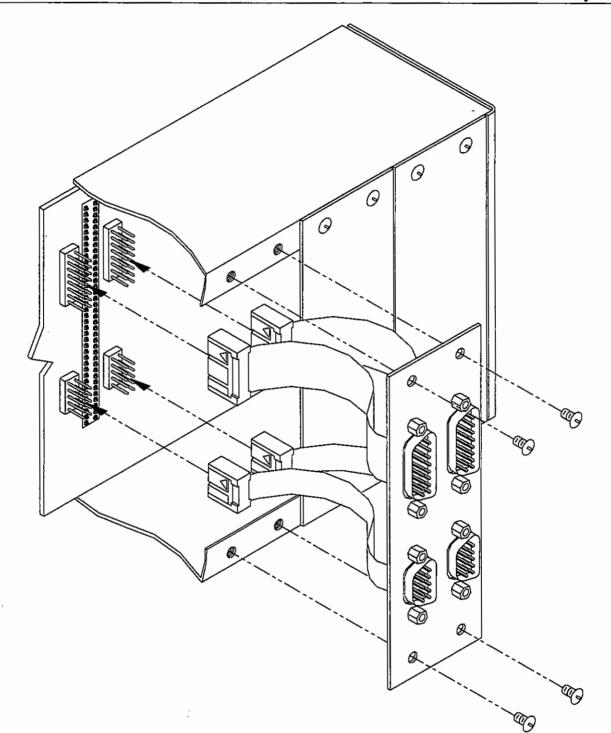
FOR-22 Interface Rear Cable Assembly Panel
